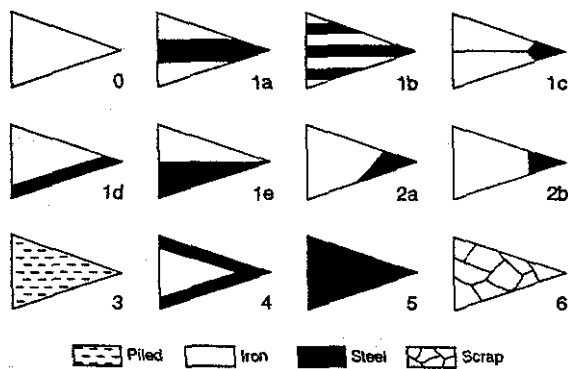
Methods of welding iron to steel (S Holden)
